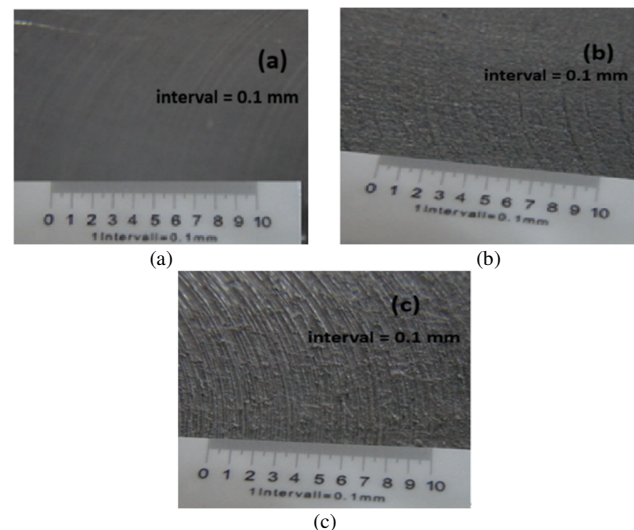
Appearance of the welded joint at 1000 rpm: (a) 20 mm/min, (b) 80 mm/min, and (c) 140 mm/min.
